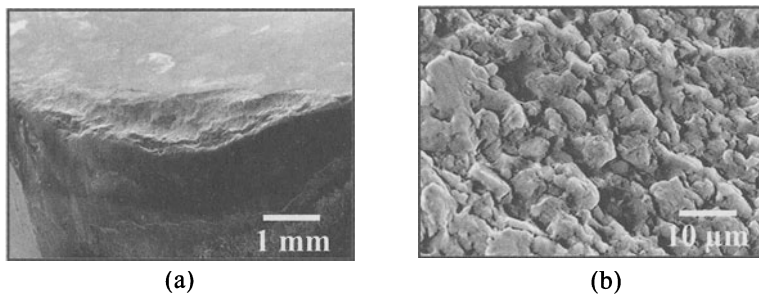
(a) PCBN tool wear, (b) transgranular and intergranular fracture of PCBN particles
